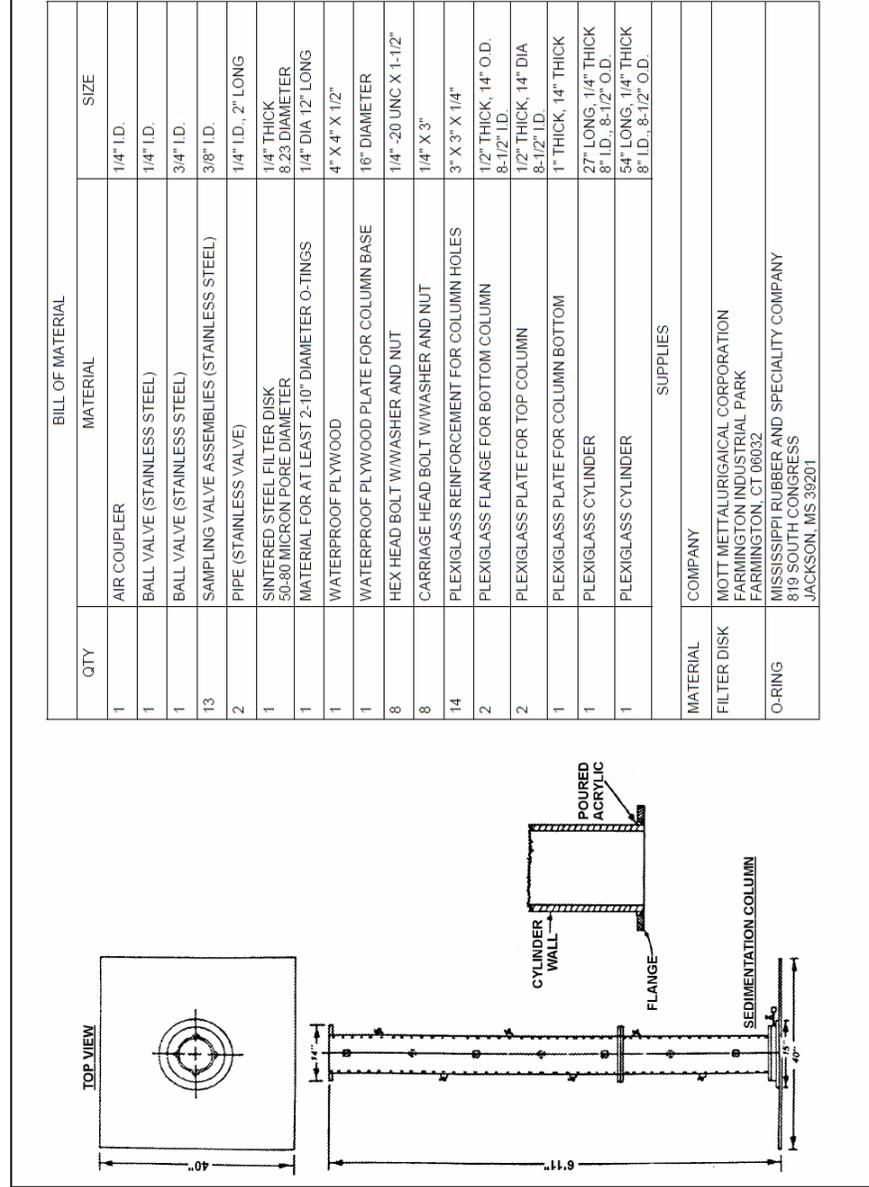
Plan for Sedimentation Column and Specifications for Settling Column
